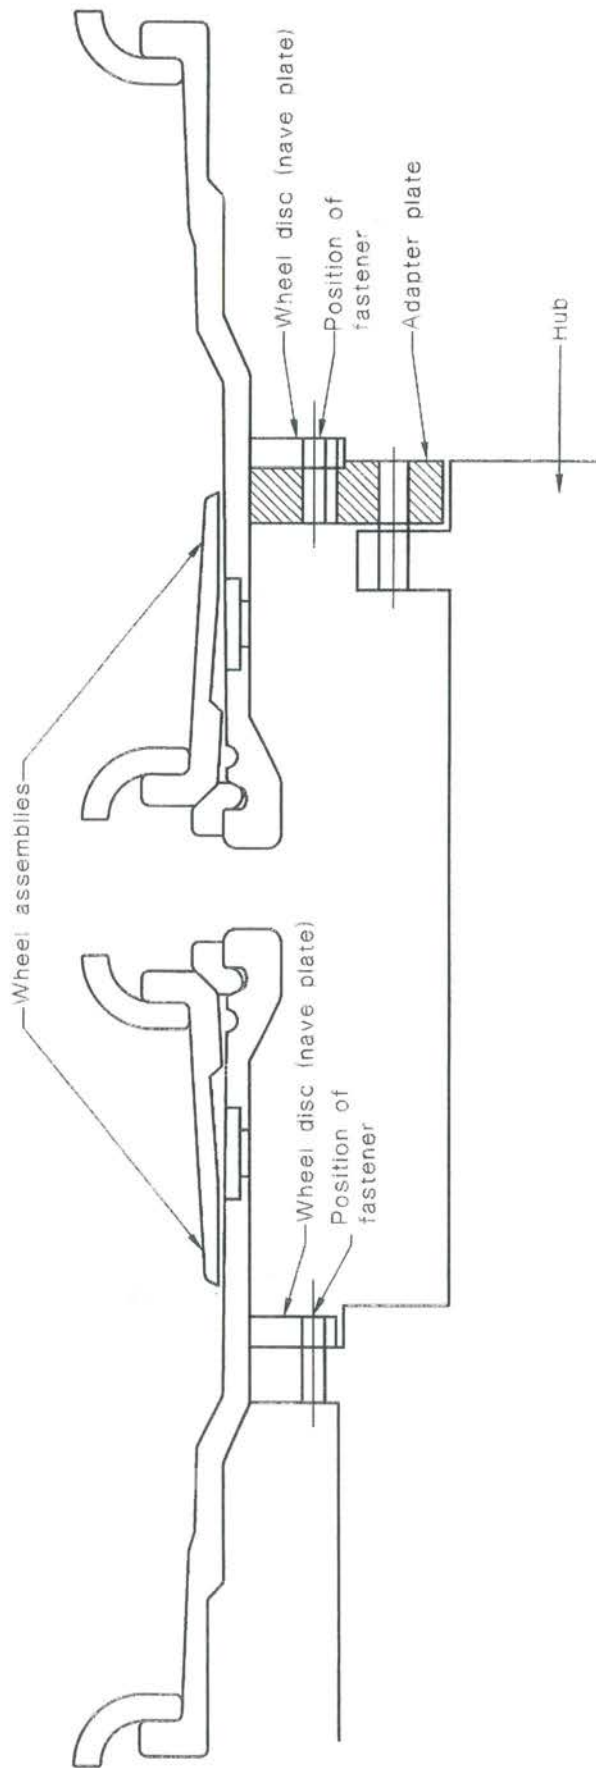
DUAL WHEEL ASSEMBLIES
